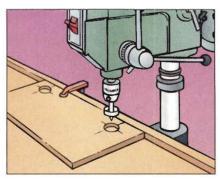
A 35 mm boring bit chucked in your drill press is the best bet for drilling the cup hole for the hinge assembly.
